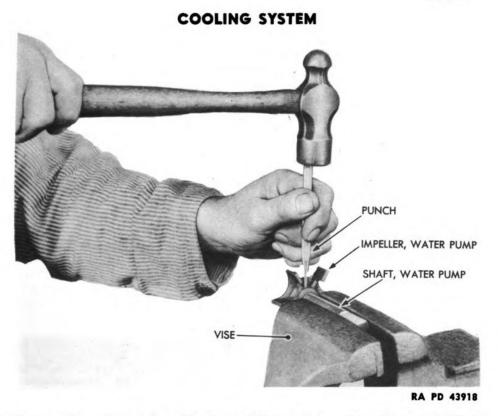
Removing Pin from Water Pump Impeller and Shaft
